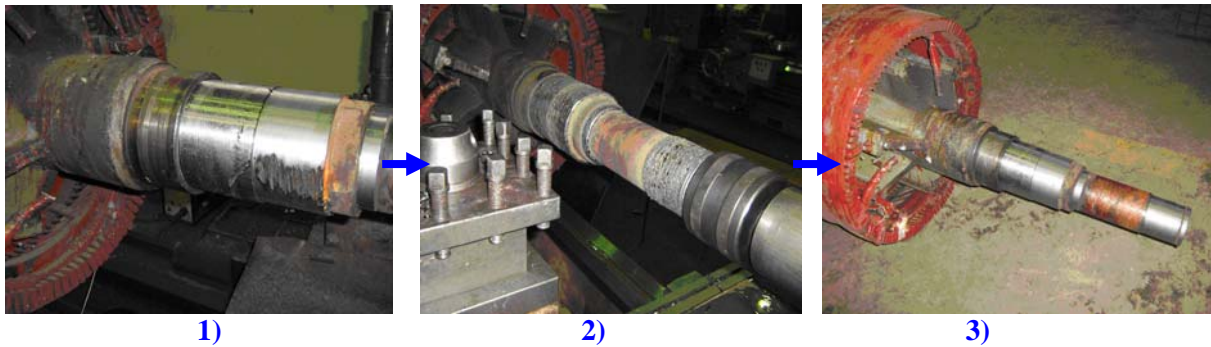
Stages of welding repair of 630 KW shaft, mechanically damaged
